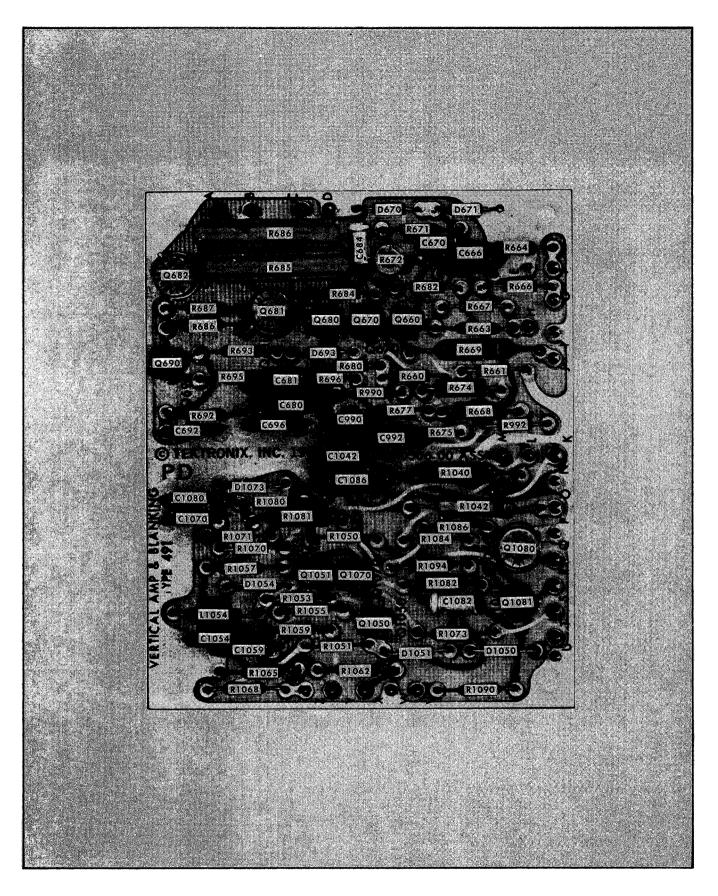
Vertical Amplifier and Blanking board assembly with component call out.
